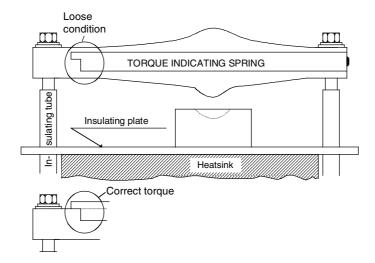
Aluminium spring with welded indicating spring
